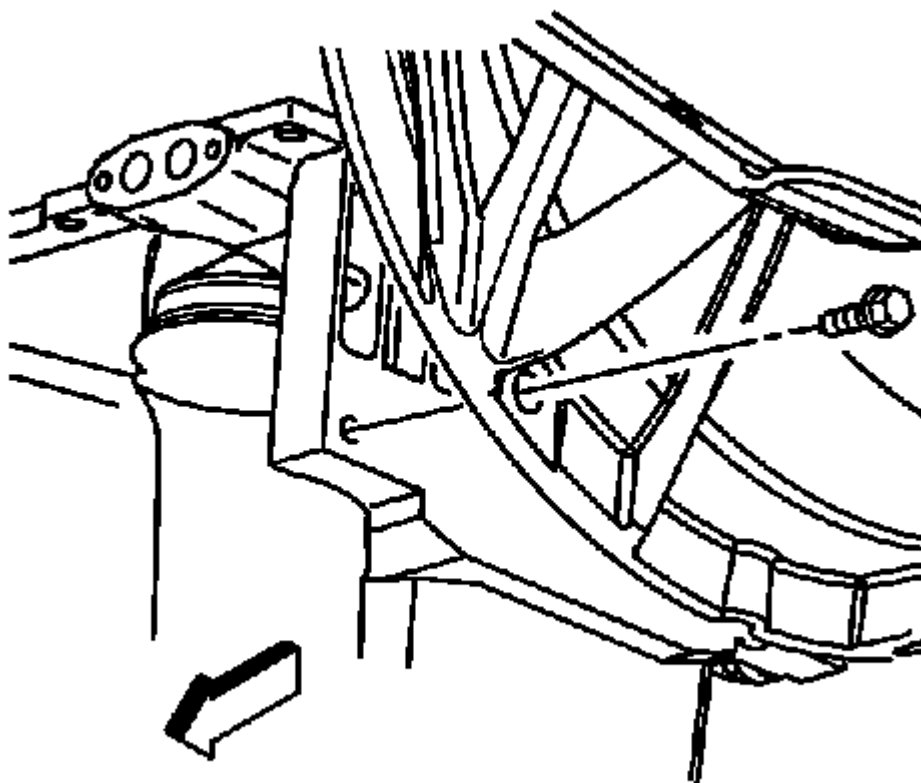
Identifying Stud & Bolt Securing Transmission To Engine (Right Side)
